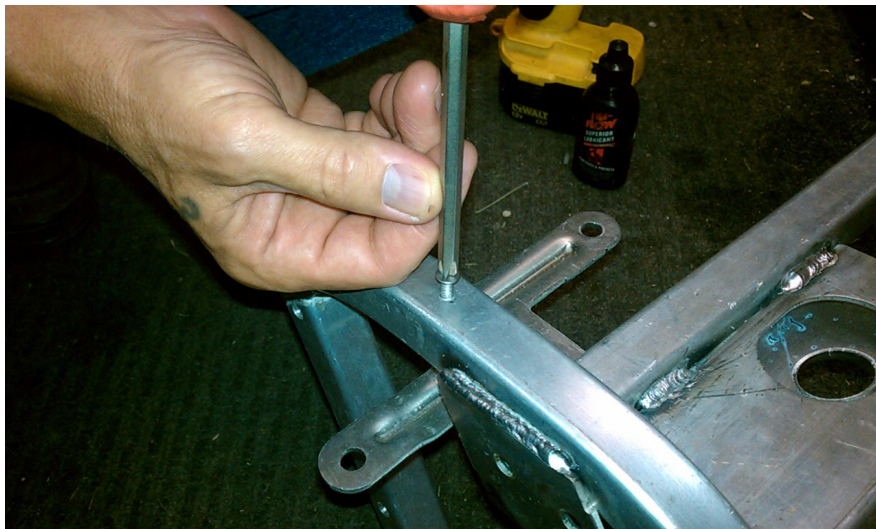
Note: Do not use power tools to install screws, aluminum is soft and can strip easily. Align the Self Tapping Screw keeping it parallel to the Skid Plate and carefully thread it in to the newly drilled hole. Do not tighten it, only go about half way in with it. Remember, you're only using it to thread the hole. Now remove it. Using the black screw install the Fang to the Skid Plate. Just snug it down to hold the Fang in place so you can mark the other hole.
